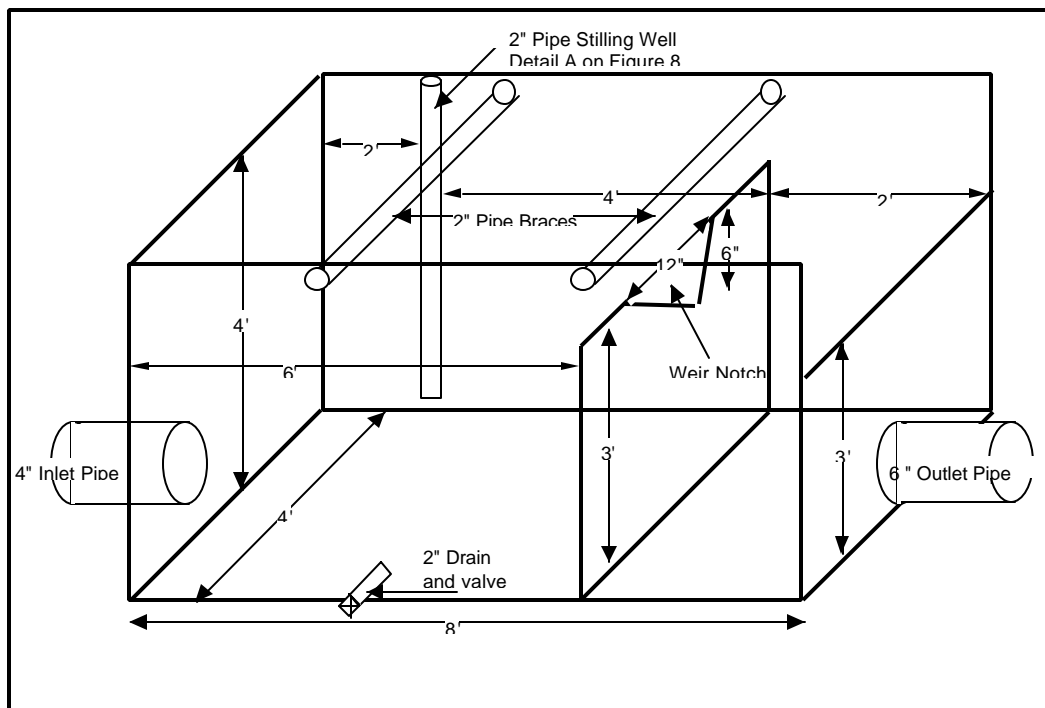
Weir box (typical dimensions for slimhole testing)
